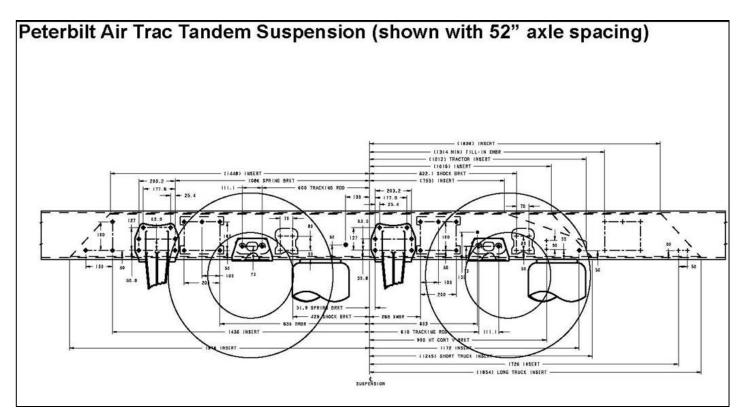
Peterbilt Air Trac Tandem Frame Drilling (Dimensions In Millimeters)
